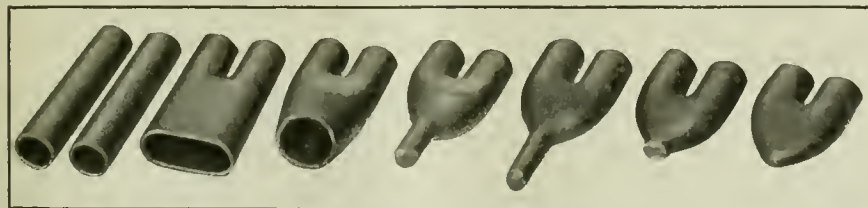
FORGED RETURN BEND, SHOWING THE STEPS IN THE MANUFACTURING PROCESS.
